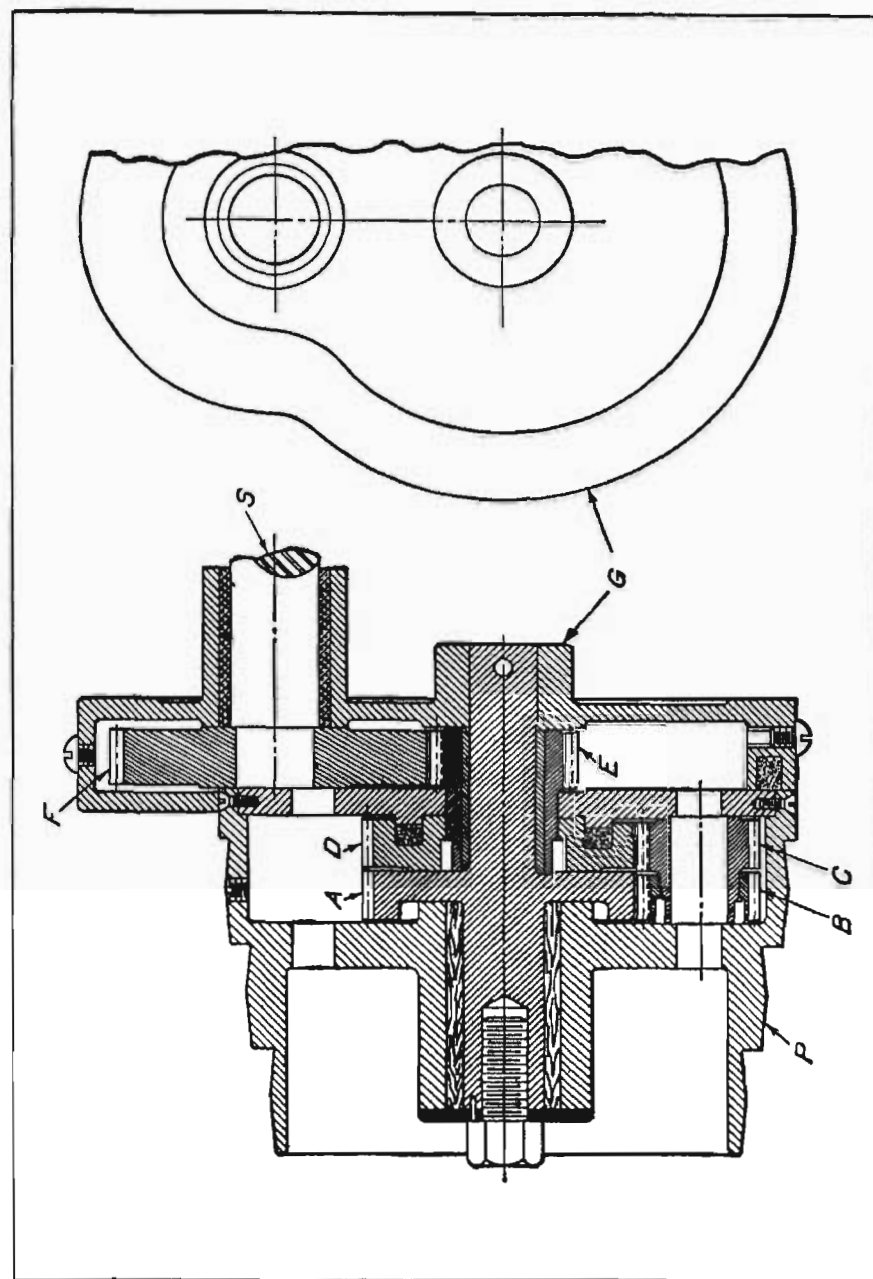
Cross-section View of Cone Pulley with High-ratio Epicyclic Reduction Gearing and Partial End View of Gear Housing.
